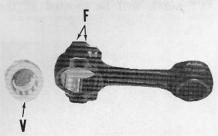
Machined side of connecting rod and cap is shown at (F). Parting surface (V) on bearing cage should form a "V" at one point when correctly assembled.
